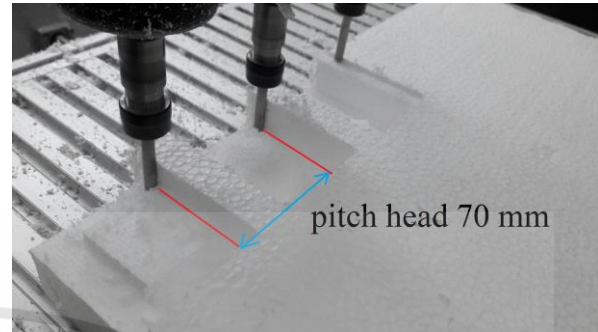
The 3-milling head CNC machine engraved the EPS foam to the example model.
